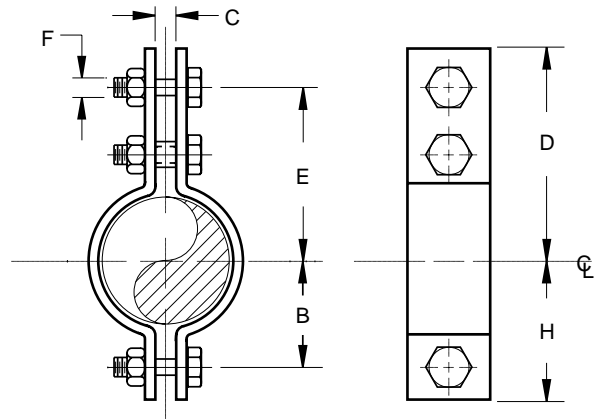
Z – HEAVY ALLOY THREE BOLT PIPE CLAMP
